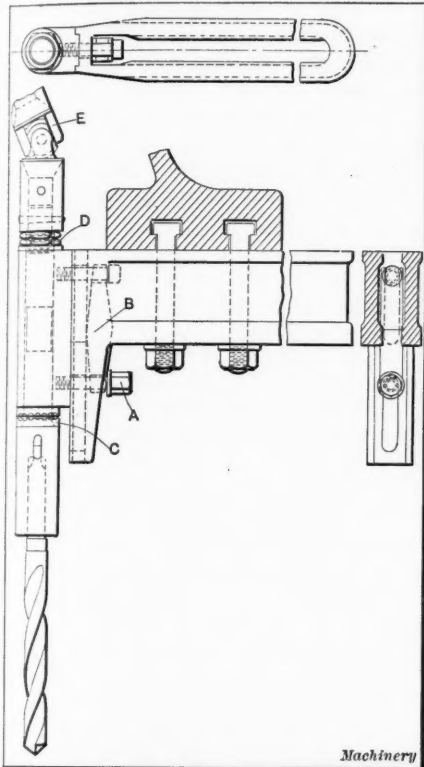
Quick-acting Device for making Vertical Adjustment of Spindle Bearings
